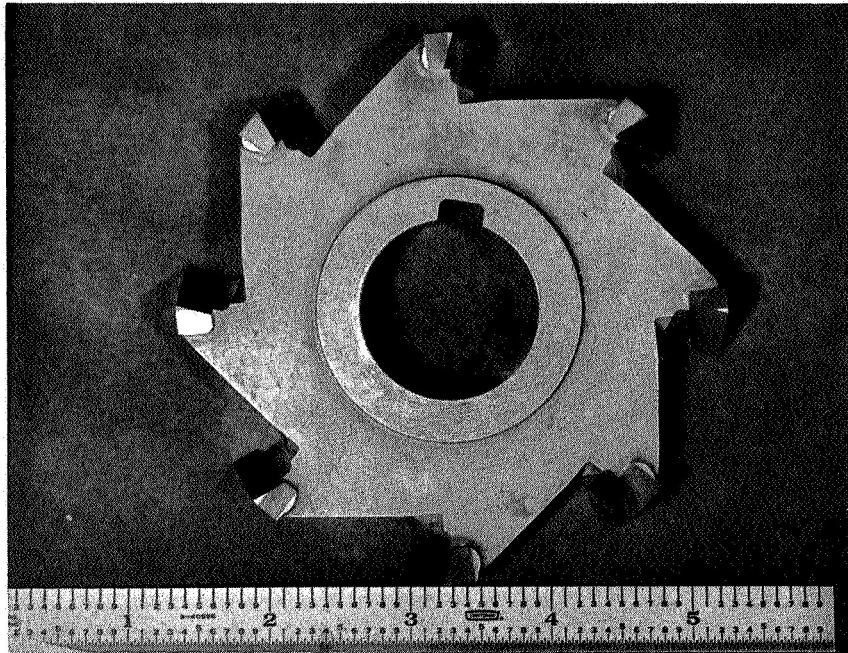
MILLING CUTTER WITH POSITIVE RADIAL RAKE
